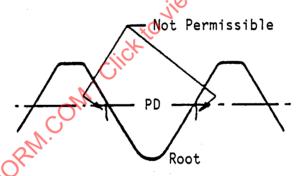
Laps Below PD Extending Toward Root, Rolled Thread
